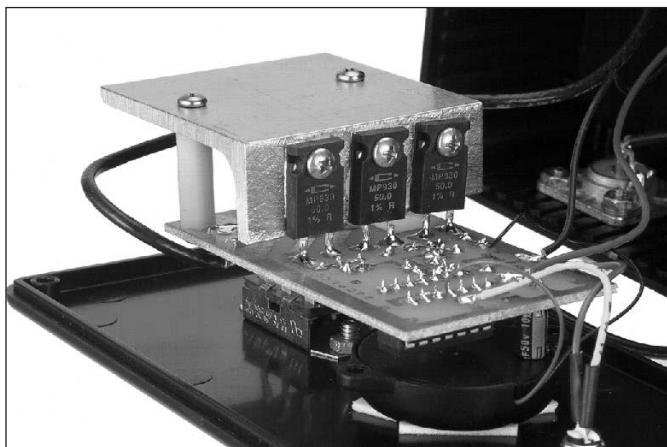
Close-up view of three CaddockTO-220 style bridge resistors mounted on the heat sink.
